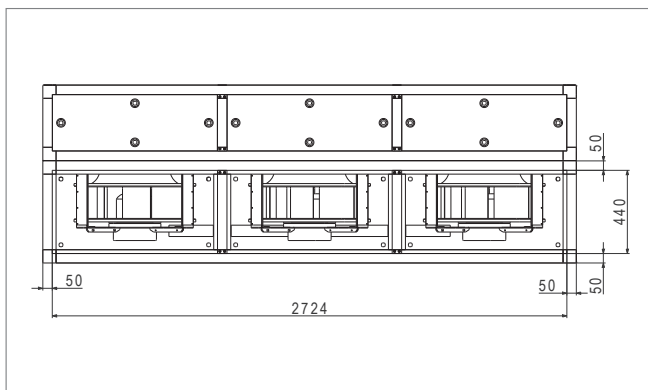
Dimensional drawing exhaust air duct (dimensions in mm)
